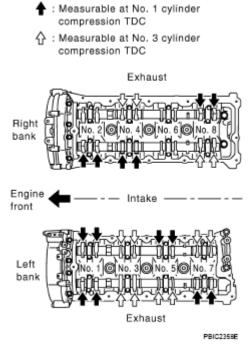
Identifying Valve Clearances Checking Locations At No.1 Cylinder
